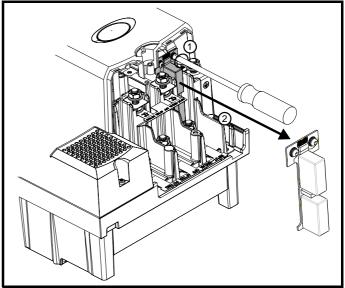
Removal of the internal EMC filter, size 2 and 3
